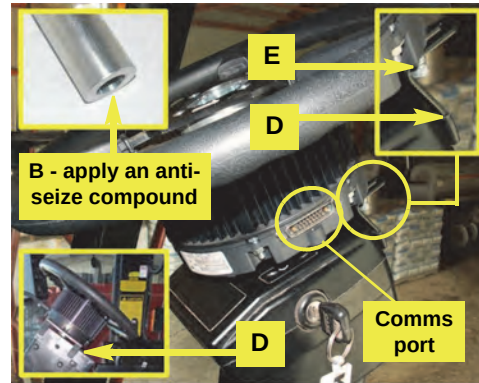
with insets: Steering wheel/anti-rotation bracket assembly installed - 21nn-71nn models (16nn models, bottom inset)
